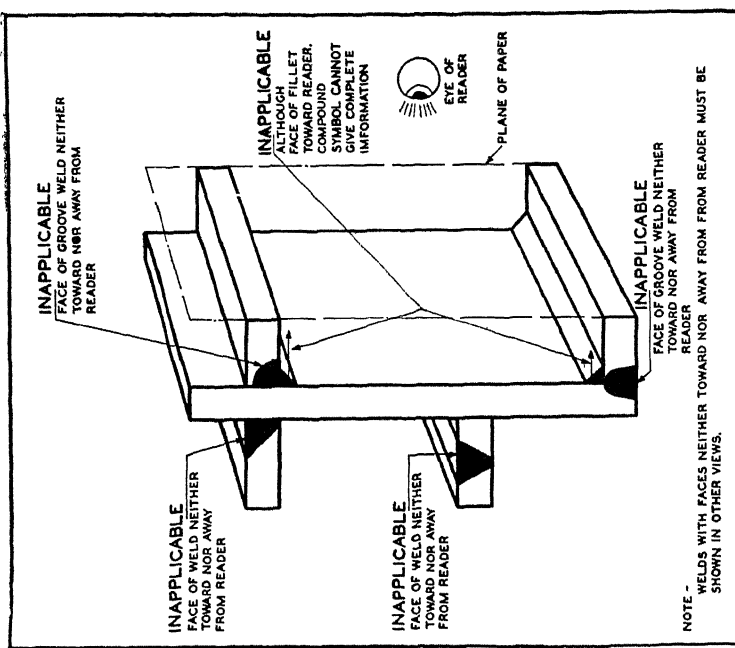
Inapplicable facing of groove welds parallel to plane of paper.
